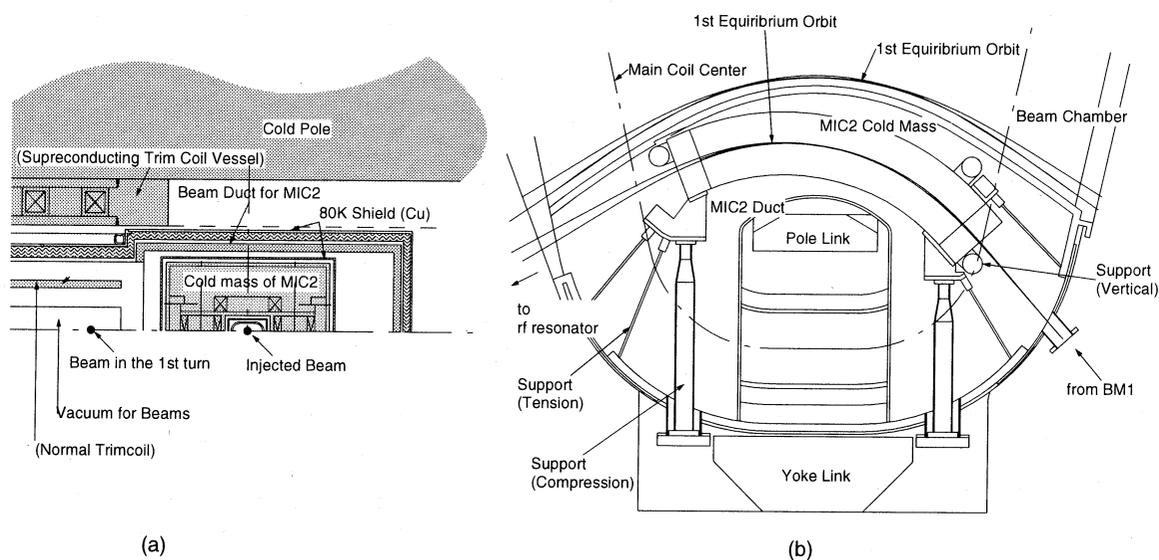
MIC2 Installation: (a) cross sectional view and (b) plan view.
